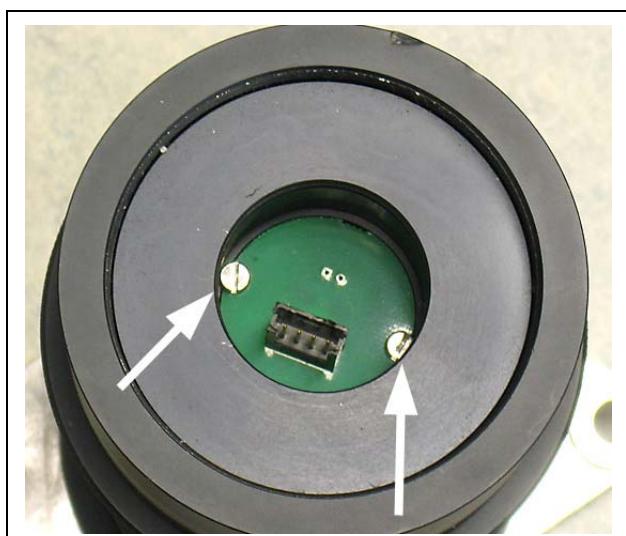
The LED unit, located in one end of the assembly, comes loose when the 2 screws are opened.
